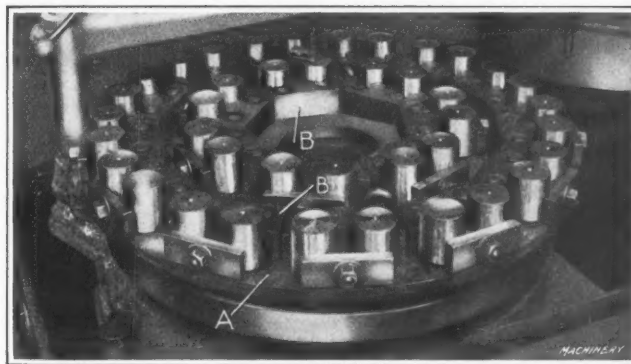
Special Fixture for holding Roller Bearing Rolls on Blanchard Vertical Surface Grinder
